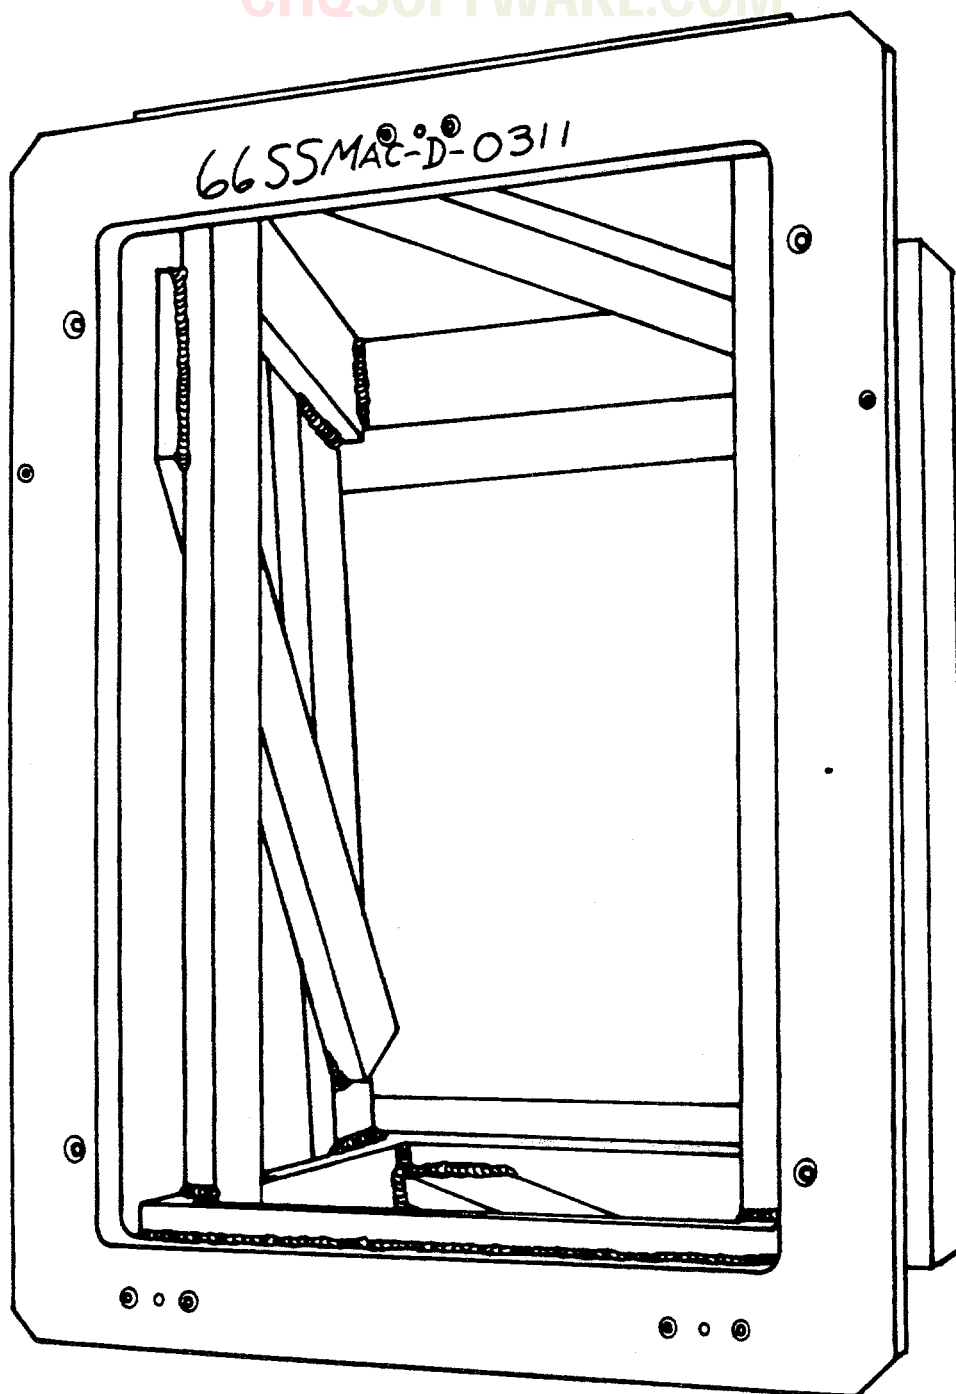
ADAPTER FIXTURE (UH-1H)
